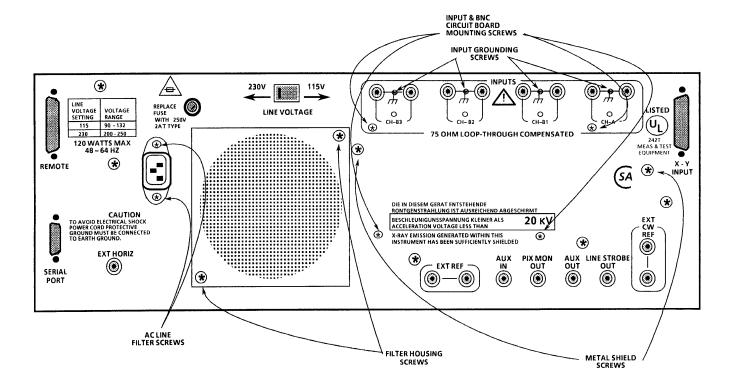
Rear panel for the Tektronix 1780R-Series Video Measurement Set showing the location of sub-assembly mounting screws
